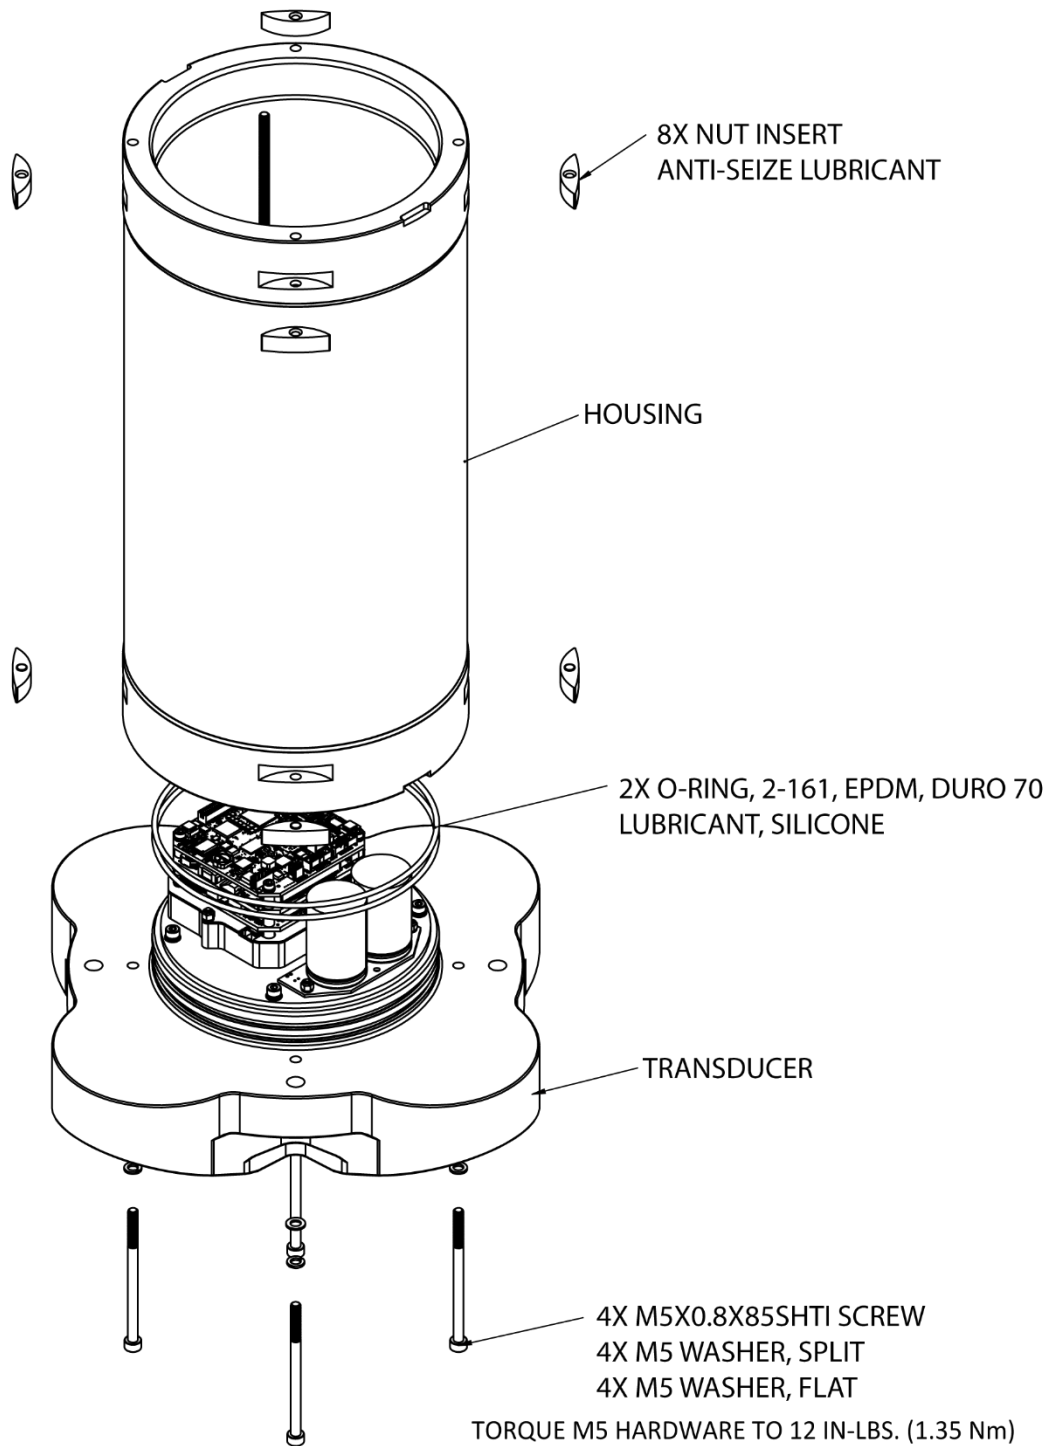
300/600 kHz Self-Contained Parts Location – Housing
